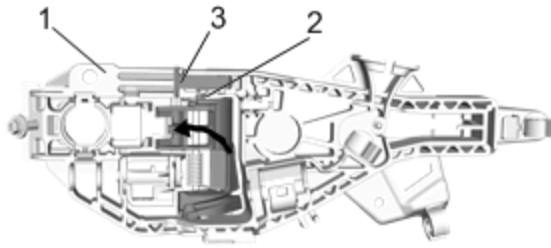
Side Door Outside Handle Bracket, Counter Balance And Bracket Clip
